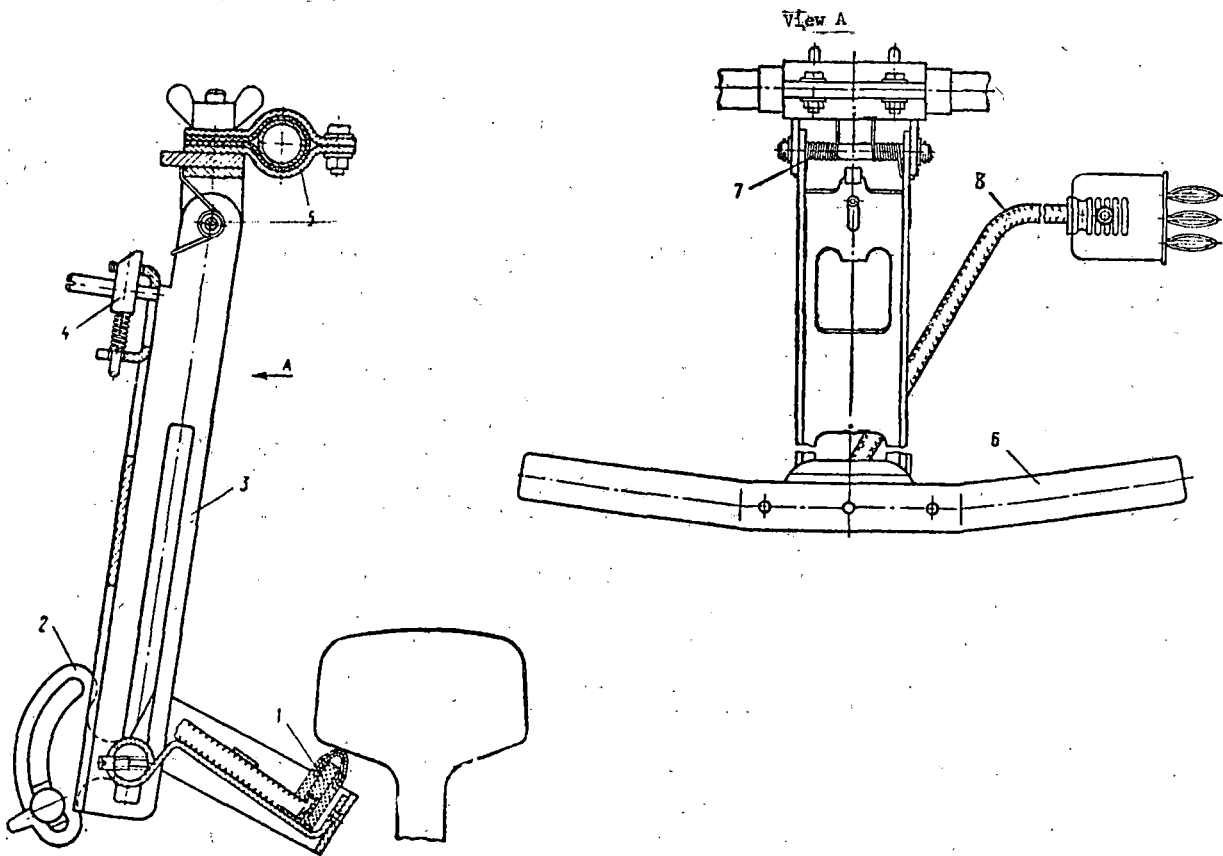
Sketch of the MRD flaw detector's lateral probe assembly.
